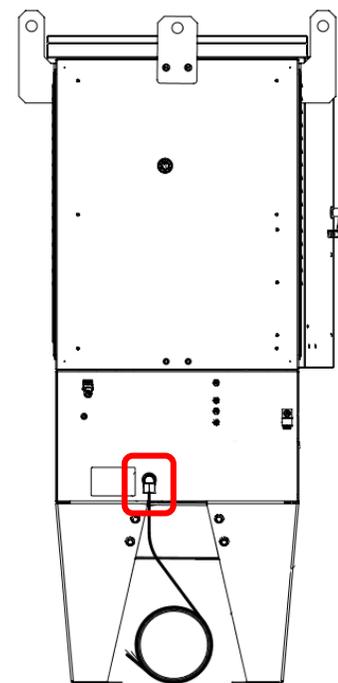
AC Power Conduit Fitting, Class 1 Division 1 Systems
